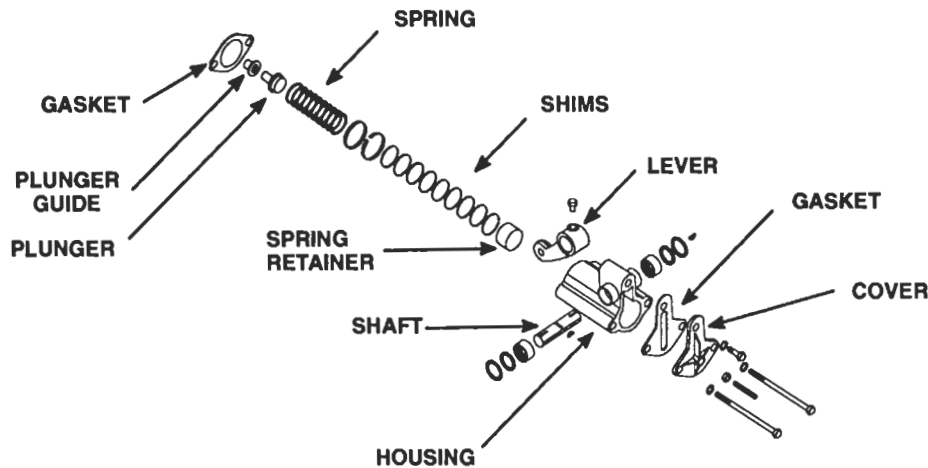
Variable Speed Spring Housing and Shaft Details and Relative Location of Parts
